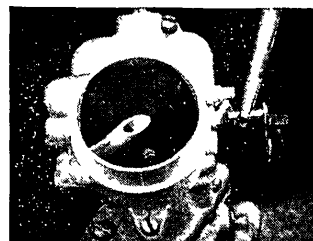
Install choke shaft and lever with spring attached. Check for loose lever on shaft
